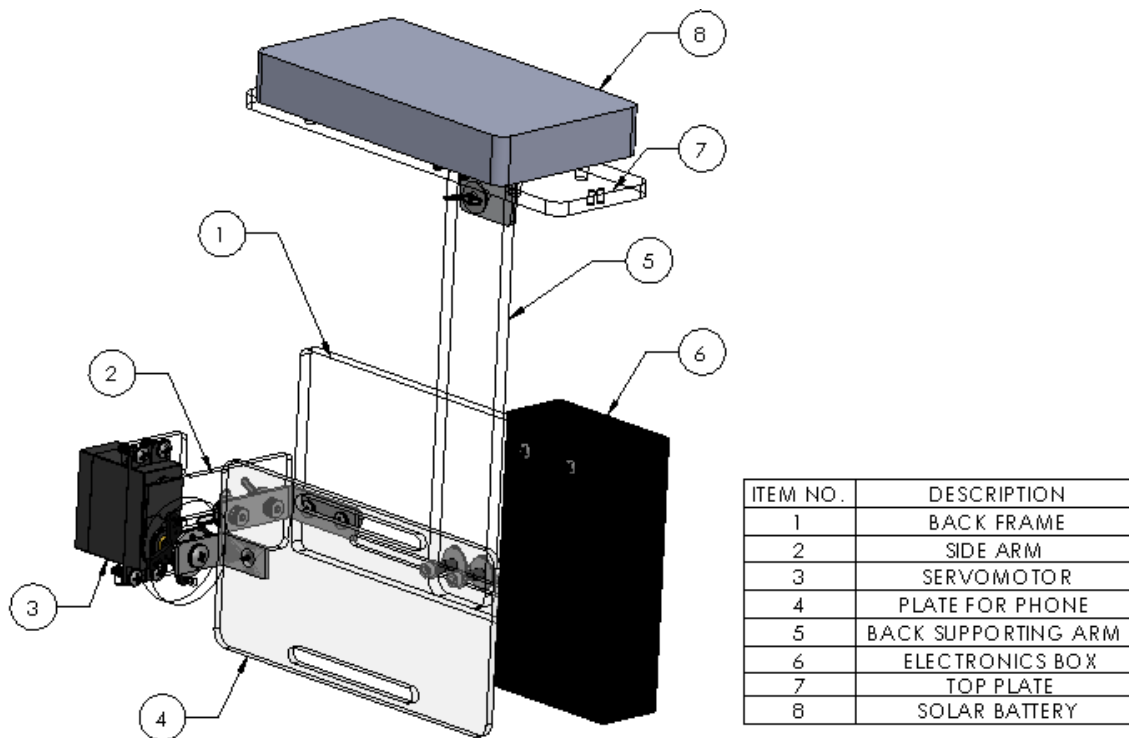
Final SolidWorks PhotoBot assembly with its main components labeled.
